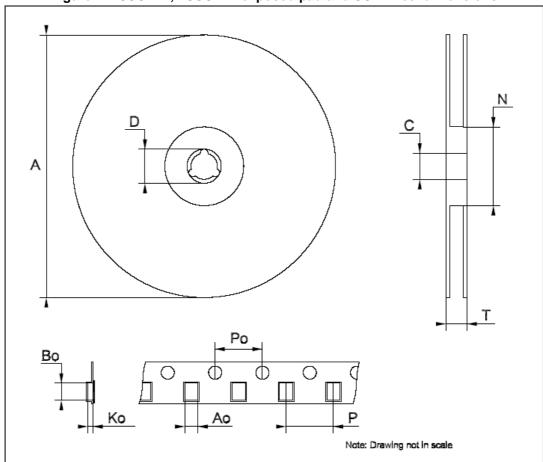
TSSOP24, TSSOP24 exposed pad and SO-24 reel dimensions
